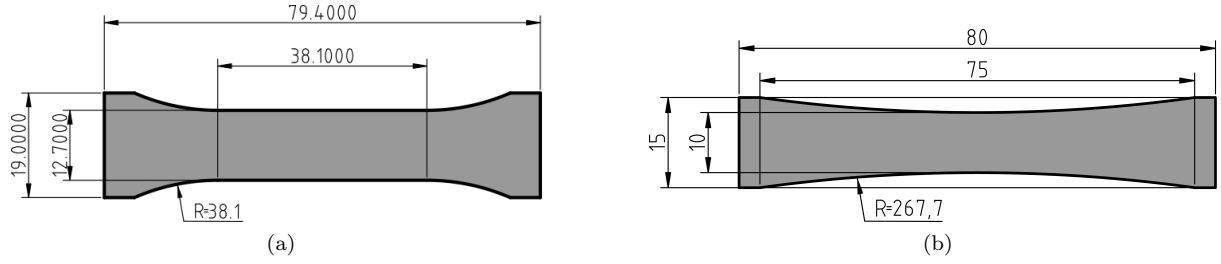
Flat specimen geometries used for pure compression test: a) dog-bone shaped ASTM-D695 specimen [20] ; b) new flat hourglass shaped specimen (dimensions are in mm) [21]
